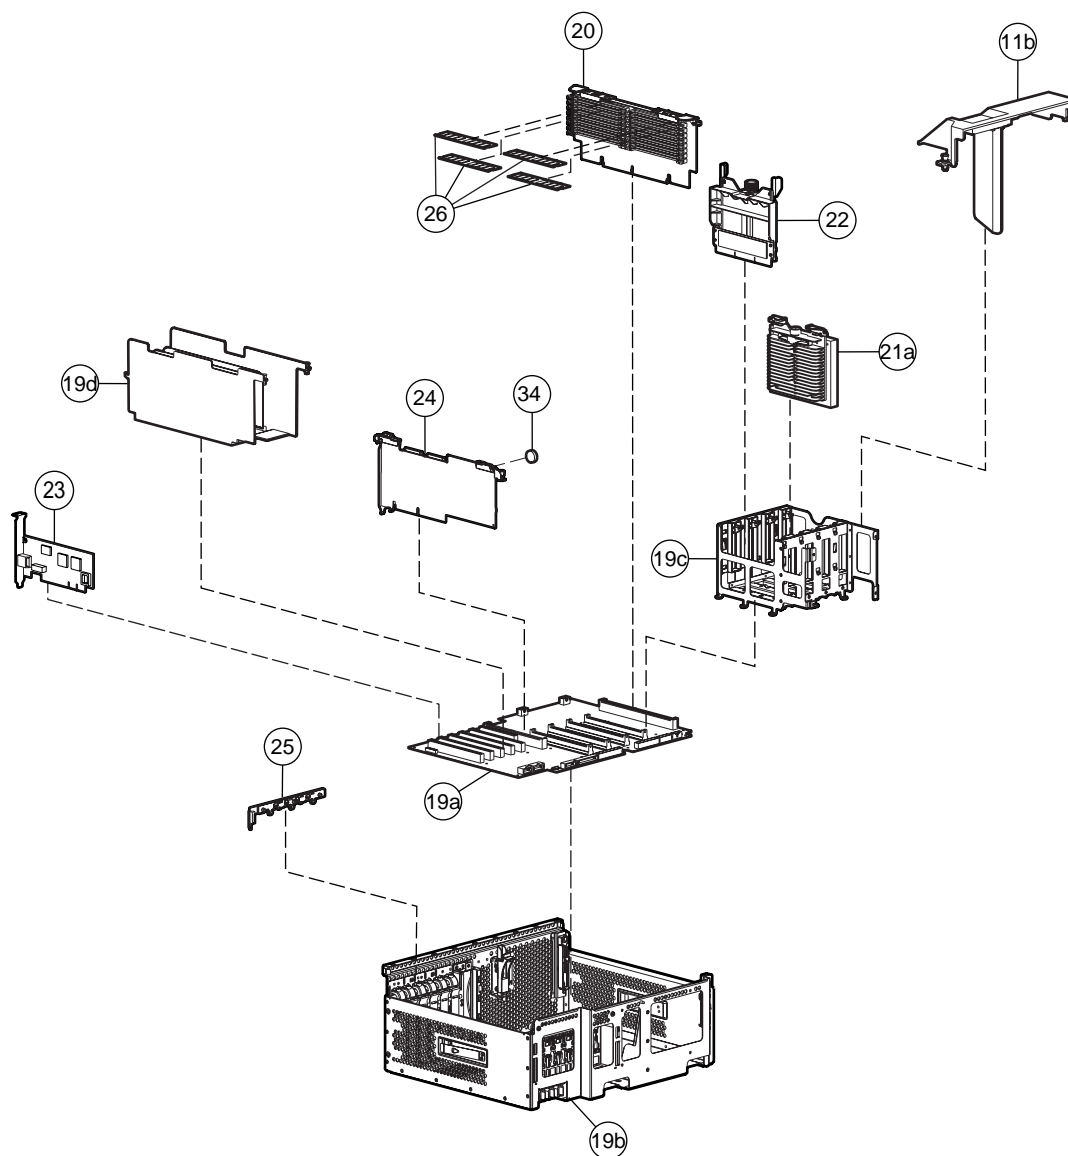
Exploded view of the ProLiant ML570 server electronics drawer system components
